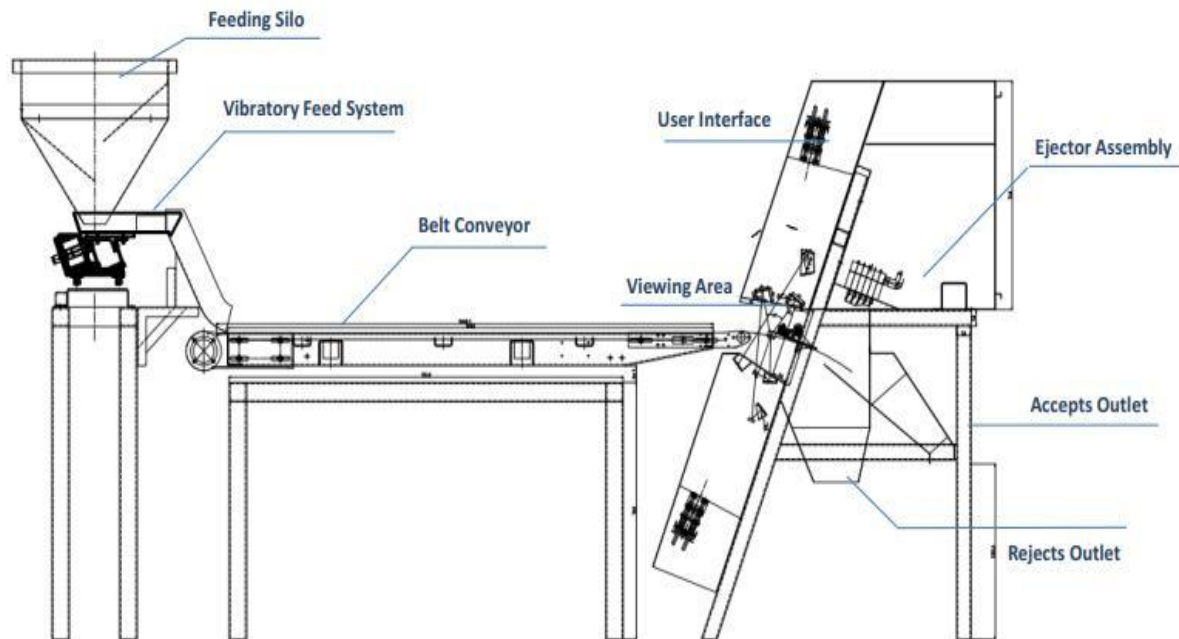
Schematic of Cashew Kernel Sorting and Grading Machine.
